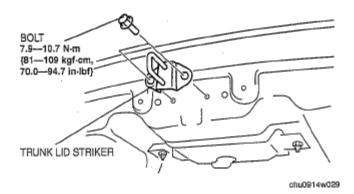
Identifying Trunk Lid Striker And Bolt With Torque Specifications Courtesy of MAZDA MOTORS CORP.
